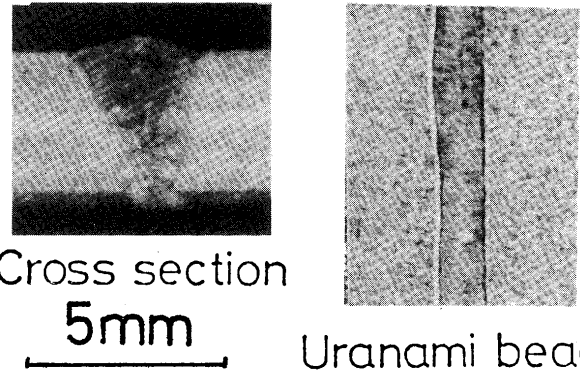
Bead crosssection and appearance of TEB welding.
